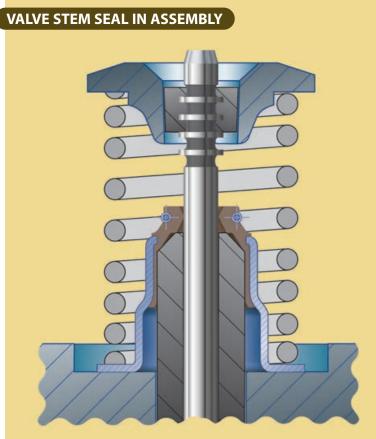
Stamping Flange On Seal O.D. Provides Seat For Valve Spring
